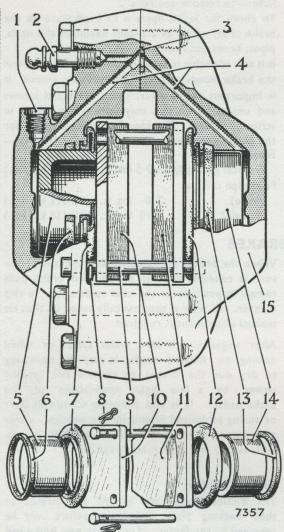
Exploded view of caliper assembly, Series II models onwards.
